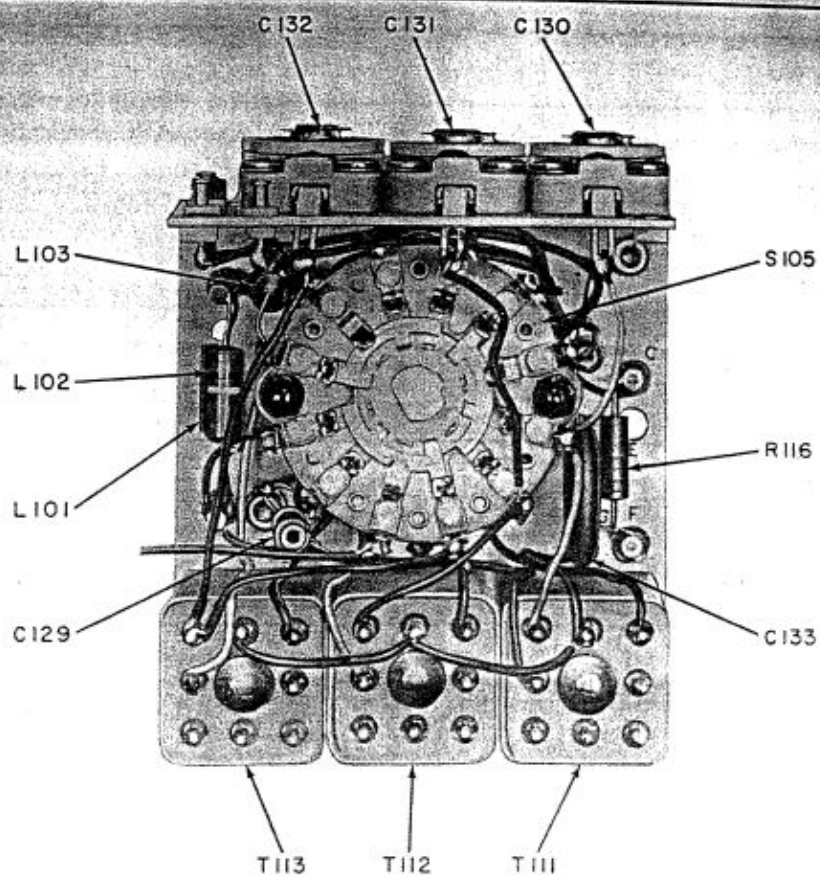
ARC Type R-30A Receiver, Second RF Assembly Z105
